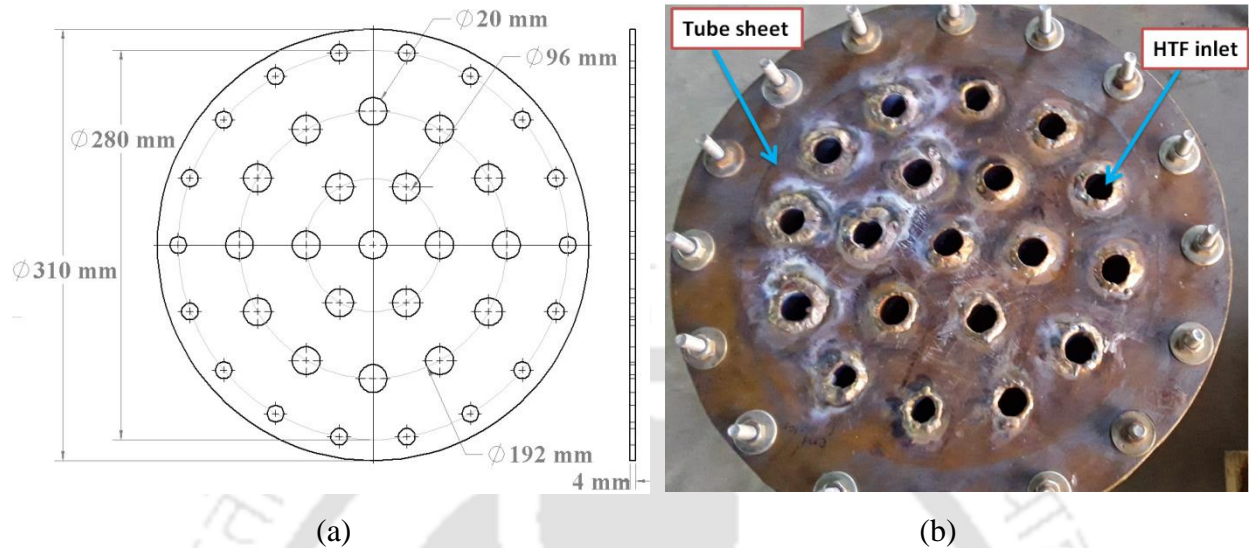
CAD view (a) and photographic view of the copper tube sheet (plate) (b)
